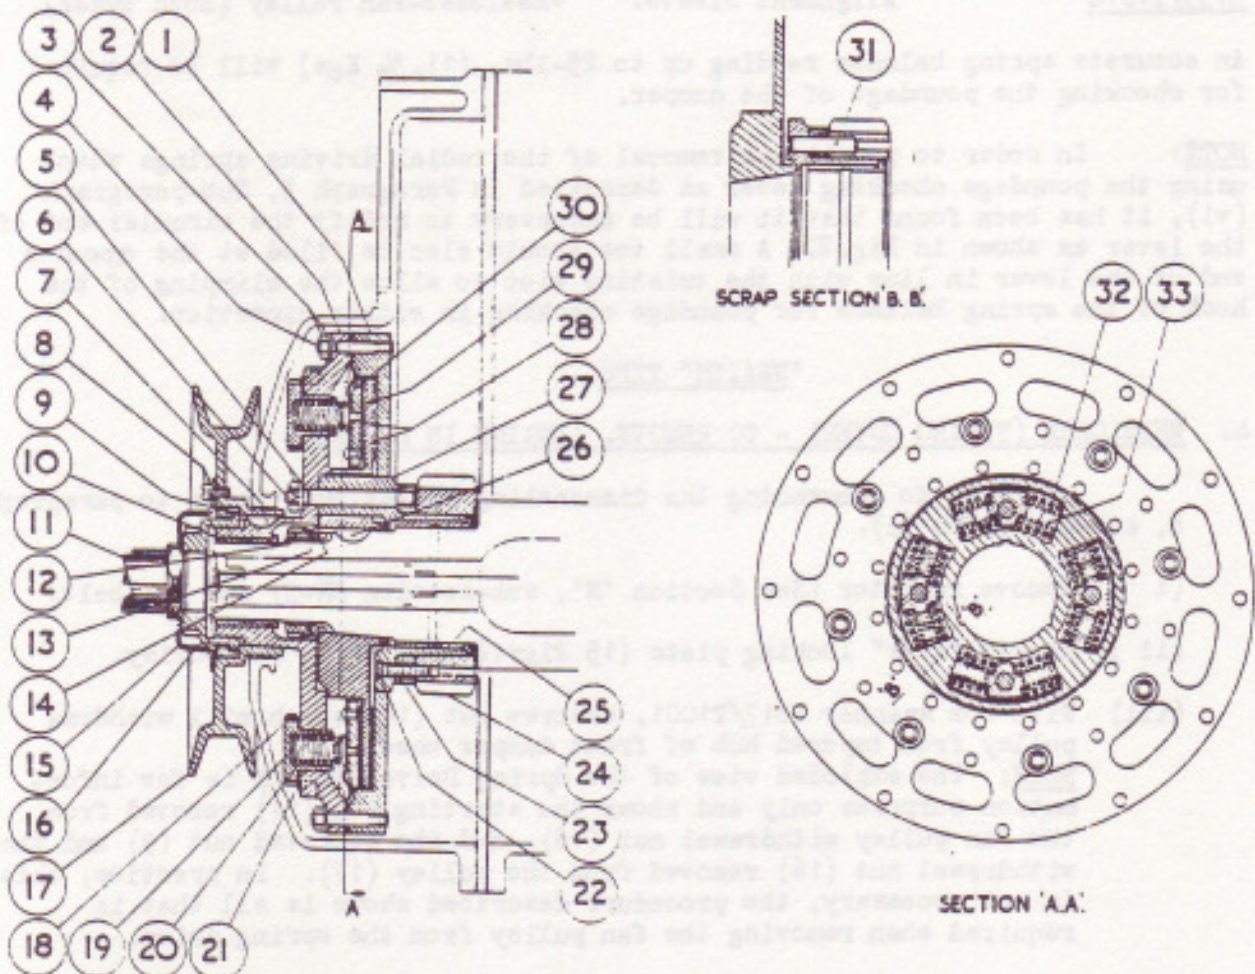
SECTION - SPRING DRIVE ("WRAITH" TYPE.)
